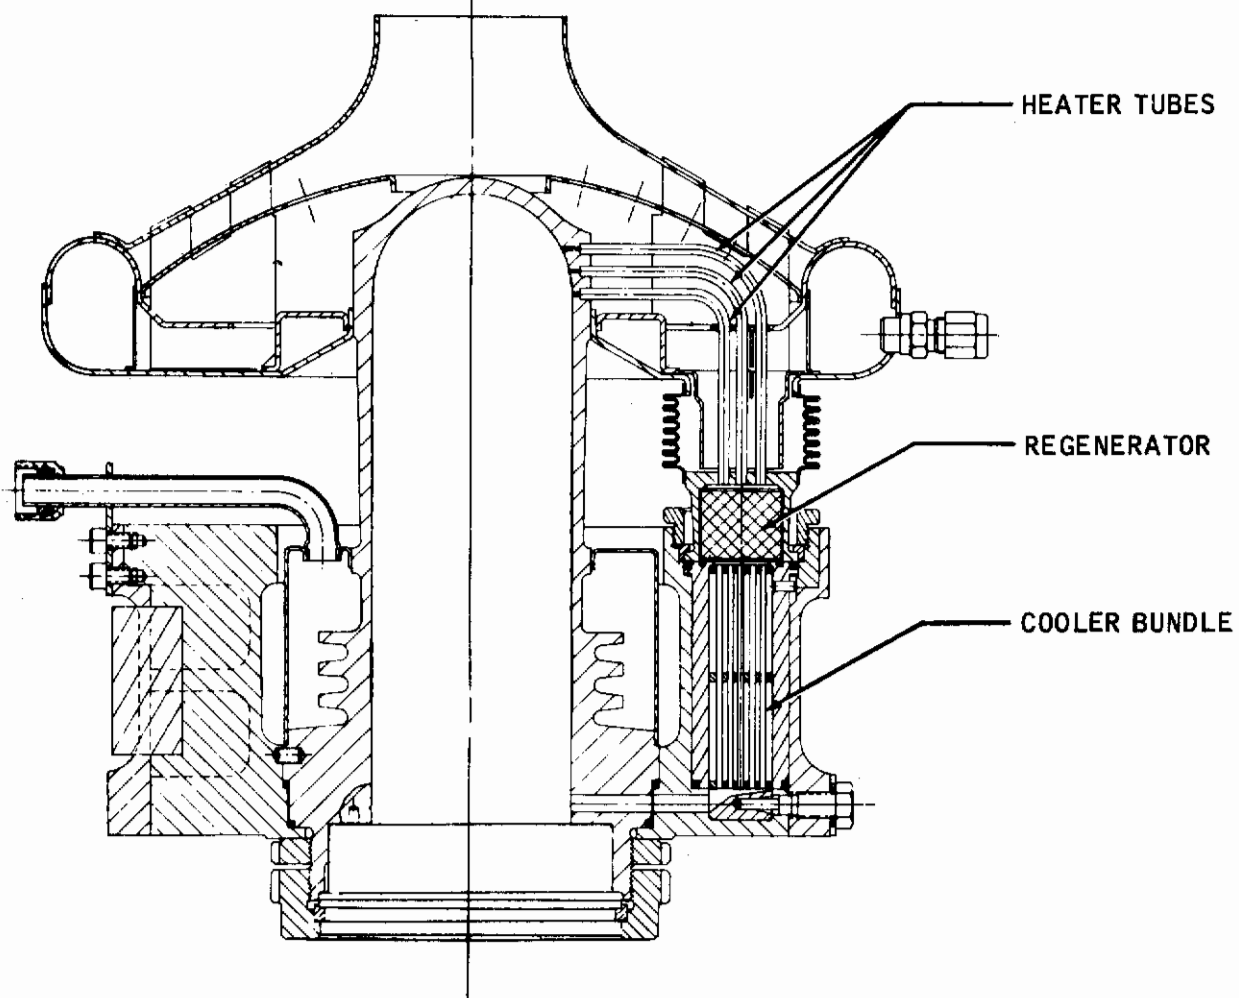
STIRLING ENGINE HEAD ASSEMBLY
